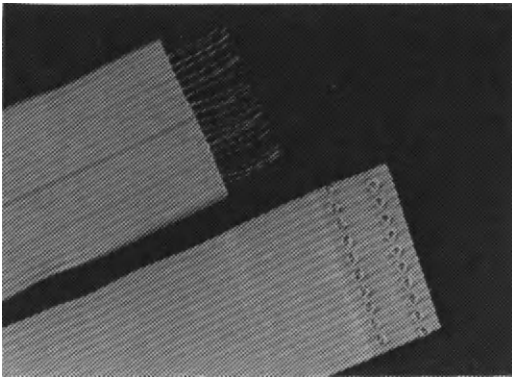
(i) Ribbon cable. The lower cable has been clamped with an insulation displacement connector which has then been removed to show the connecting points.
